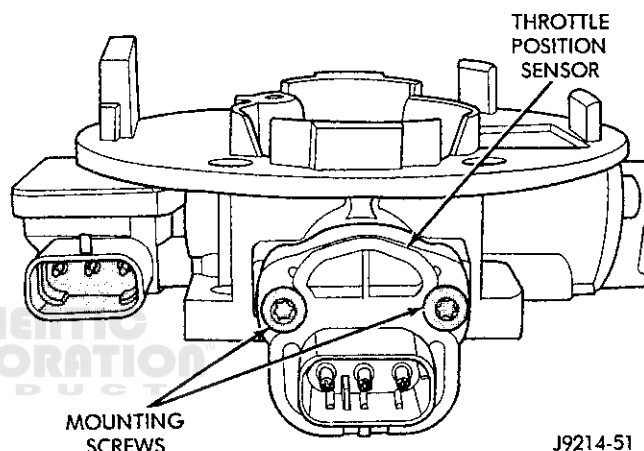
TPS Mounting Bolts—3.9L/5.2L/5.9L Engines
